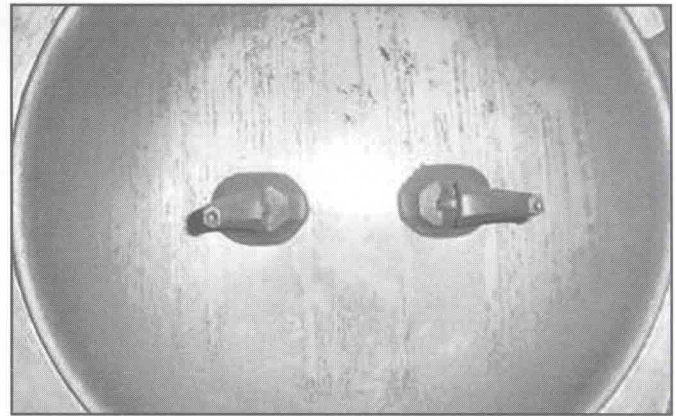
The handle pattern is hinged and separates as it is removed from the mold, leaving the handle cavity intact in the mold.
